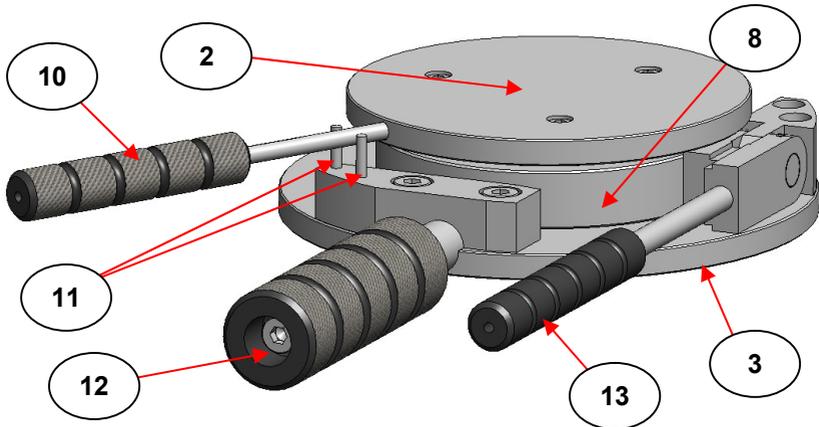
Complete Top Platen Pressing Assembly on Lower Platen Pressing Assembly with Aluminium Foils and Sample
